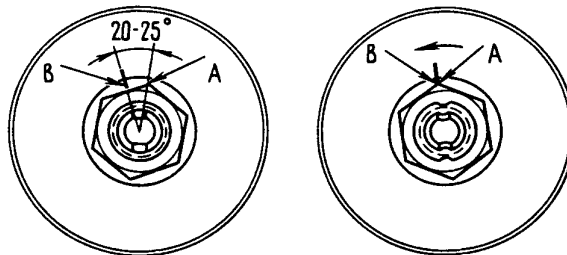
Tightening and Adjusting Front Wheel Hub Bearings:
